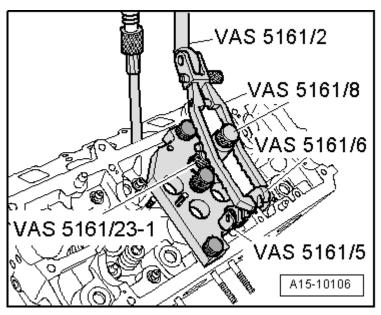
Identifying Valve Insertion Device VAS 5161/8 Inserted In Guide Plate For 3.0 Liter TDI Engine VAS 5161/23
